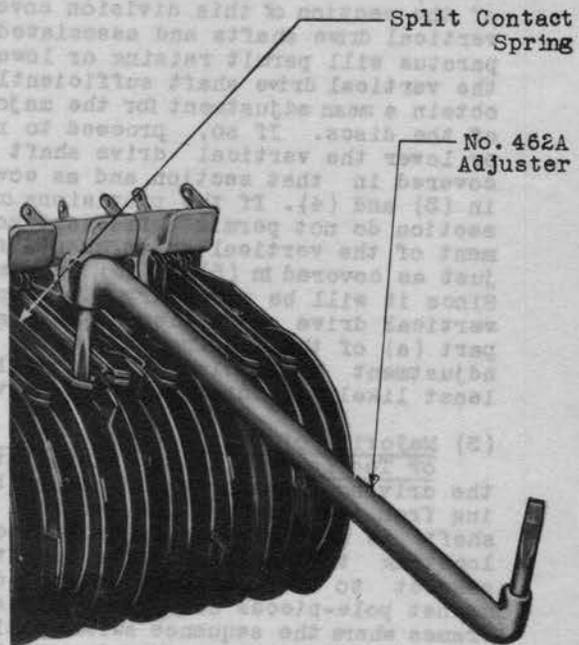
Method of Adjusting Prongs of Split Contact Springs
